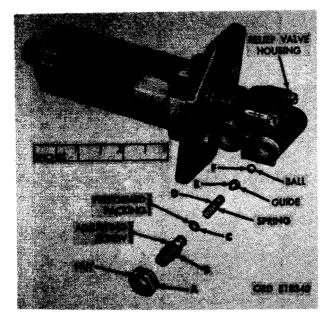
REMOVING OR INSTALLING RELIEF VALVE.
